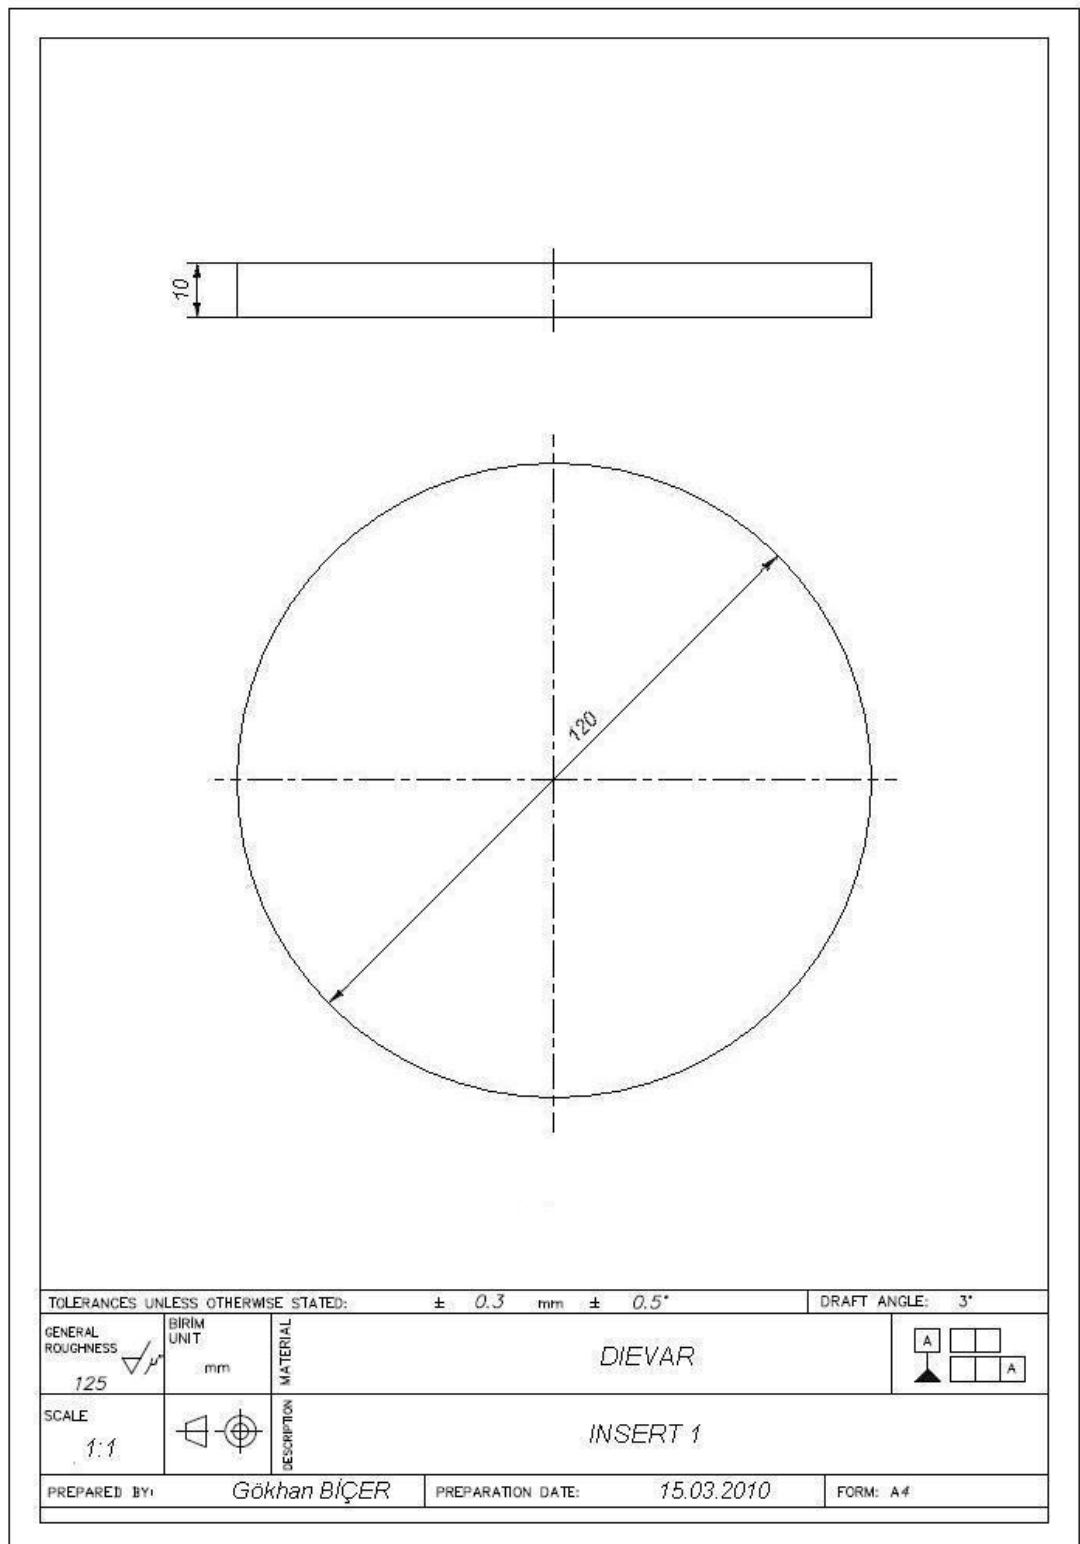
Technical Drawing of the Insert with 10 mm Height
